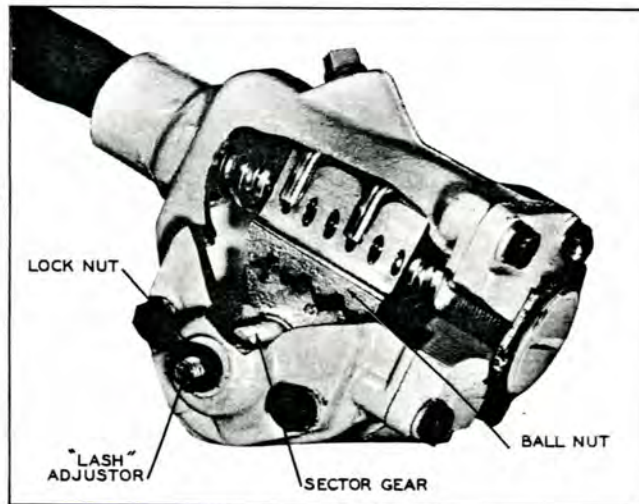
Steering Gear Lash Adjustment (Sector Gear)
